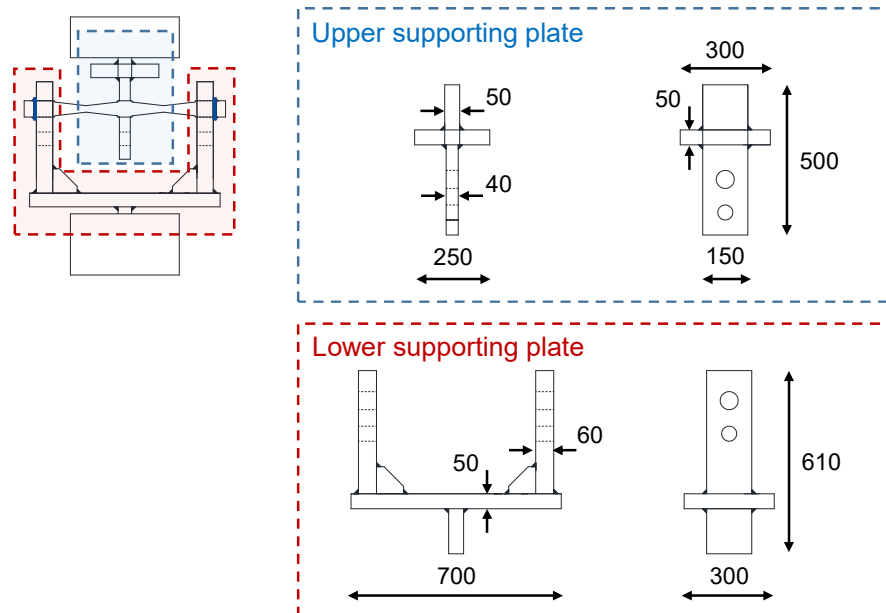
Geometry of the supporting plates of the testing apparatus (all the dimensions are in mm)
